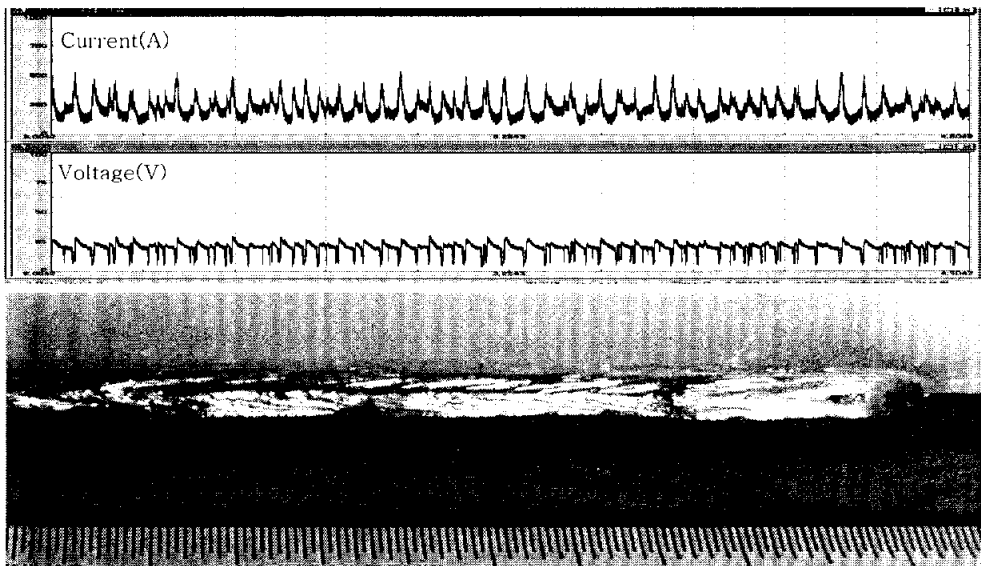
Waveforms and bead shape at welding current 227A
